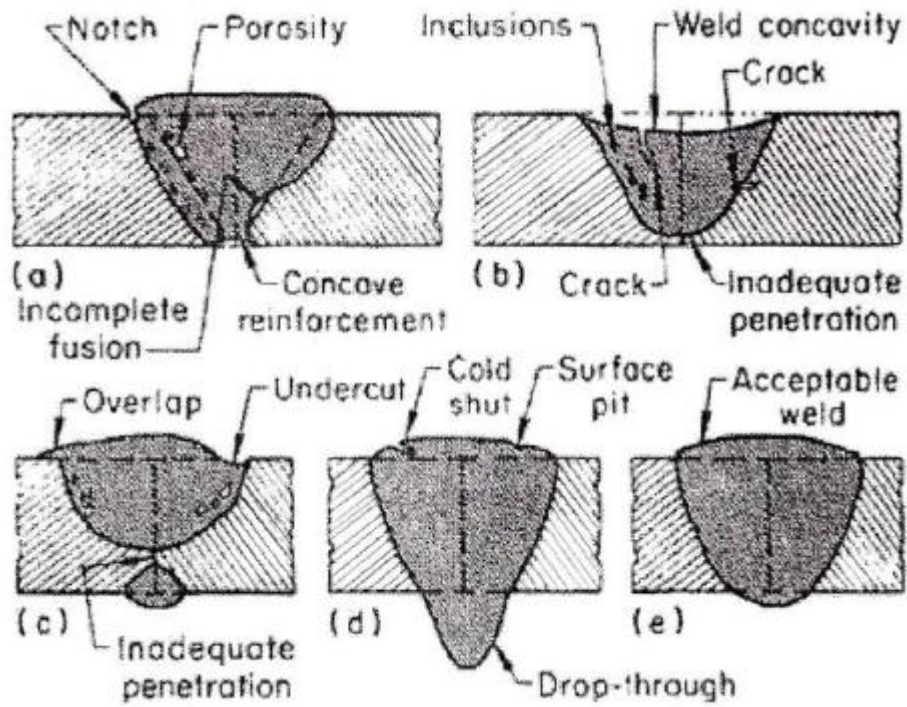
A few examples of welding defects formed in the weldment [31]
